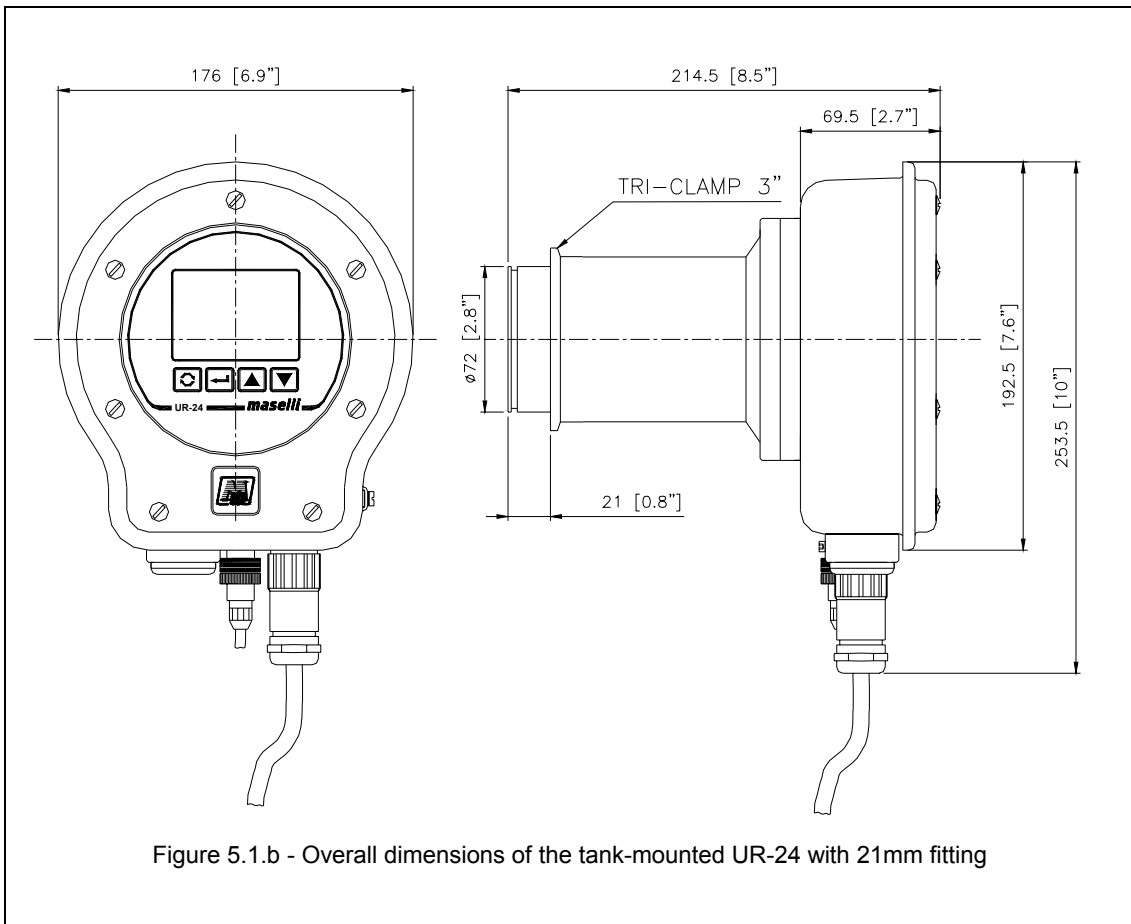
b - Overall dimensions of the tank-mounted UR-24 with 21mm fitting
